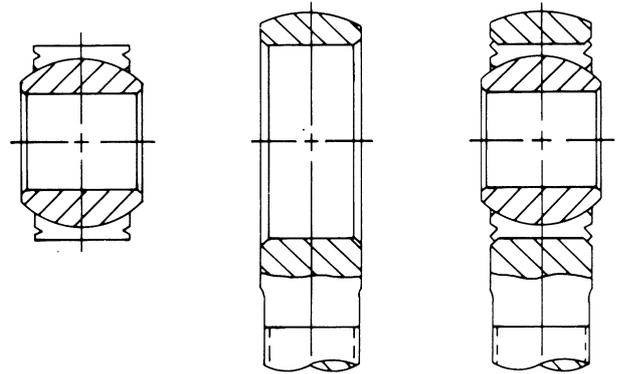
3- PIECE, V-GROOVE STAKED ROD END
